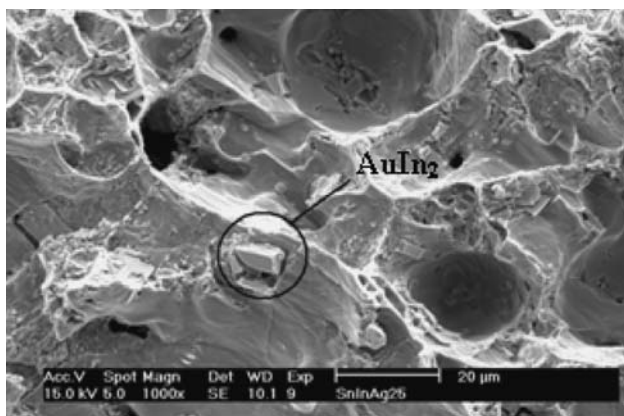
The AuIn₂ intermetallics were observed on typical irregular creep fracture surface of Sn-15In-2.8Ag BGA assembly
